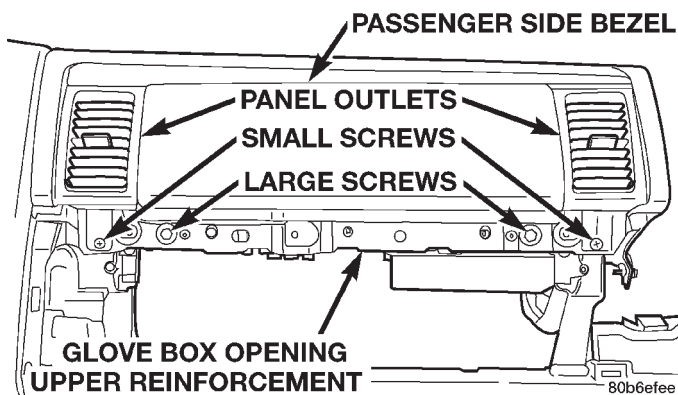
Instrument Panel Top Pad to Glove Box Opening Mounting
